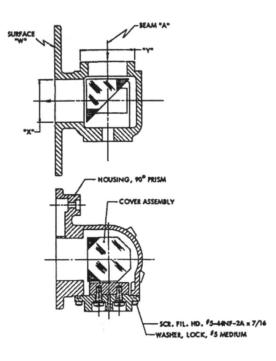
The first right-angle prism assembly. (Courtesy of the U.S. Army.)
